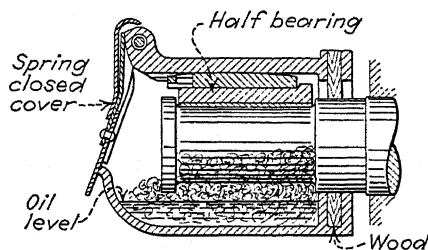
A Master Car Builders' railroad-car bearing. This is the most common type of half bearing. Note the oil reservoir and lubrication by wool waste. (Courtesy Pure Oil Company.)
